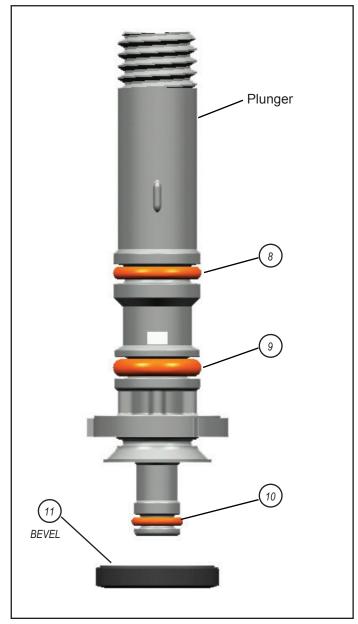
Bendix® MV-3® Manifold Valve Plunger
